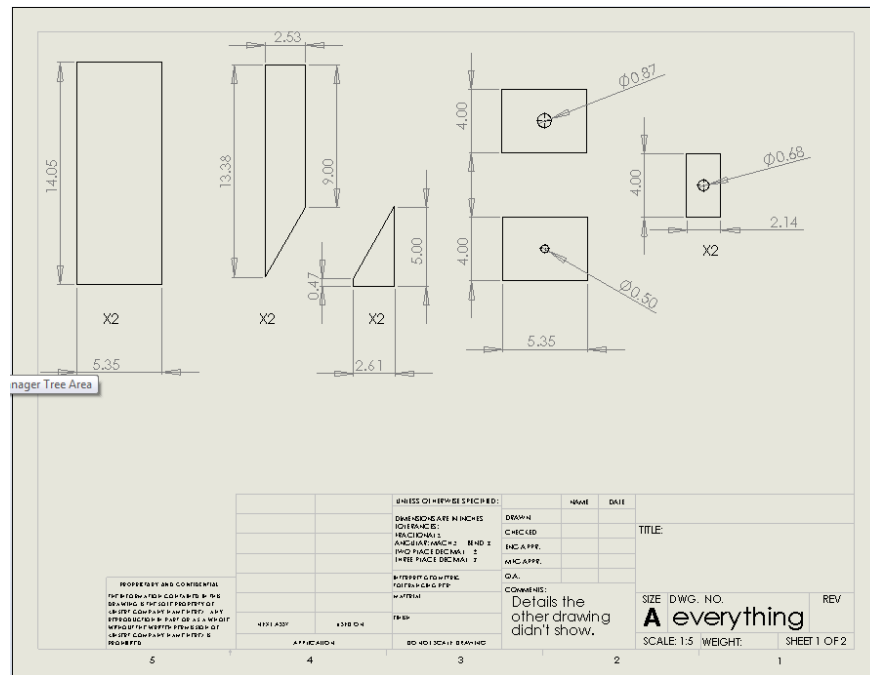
Technical drawing of the filtration block generated using Solidworks that shows key component dimensions.
